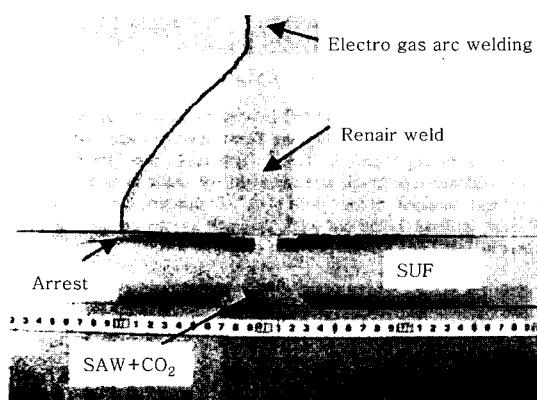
Macro section of test 6 specimen showing the arrested crack at deck plate
